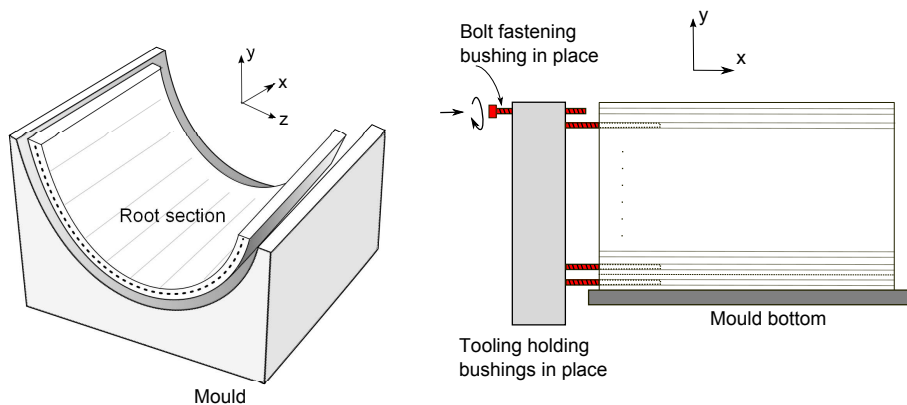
Schematic of root section moulding assembly with mould part (left) and tooling constraints (right).
